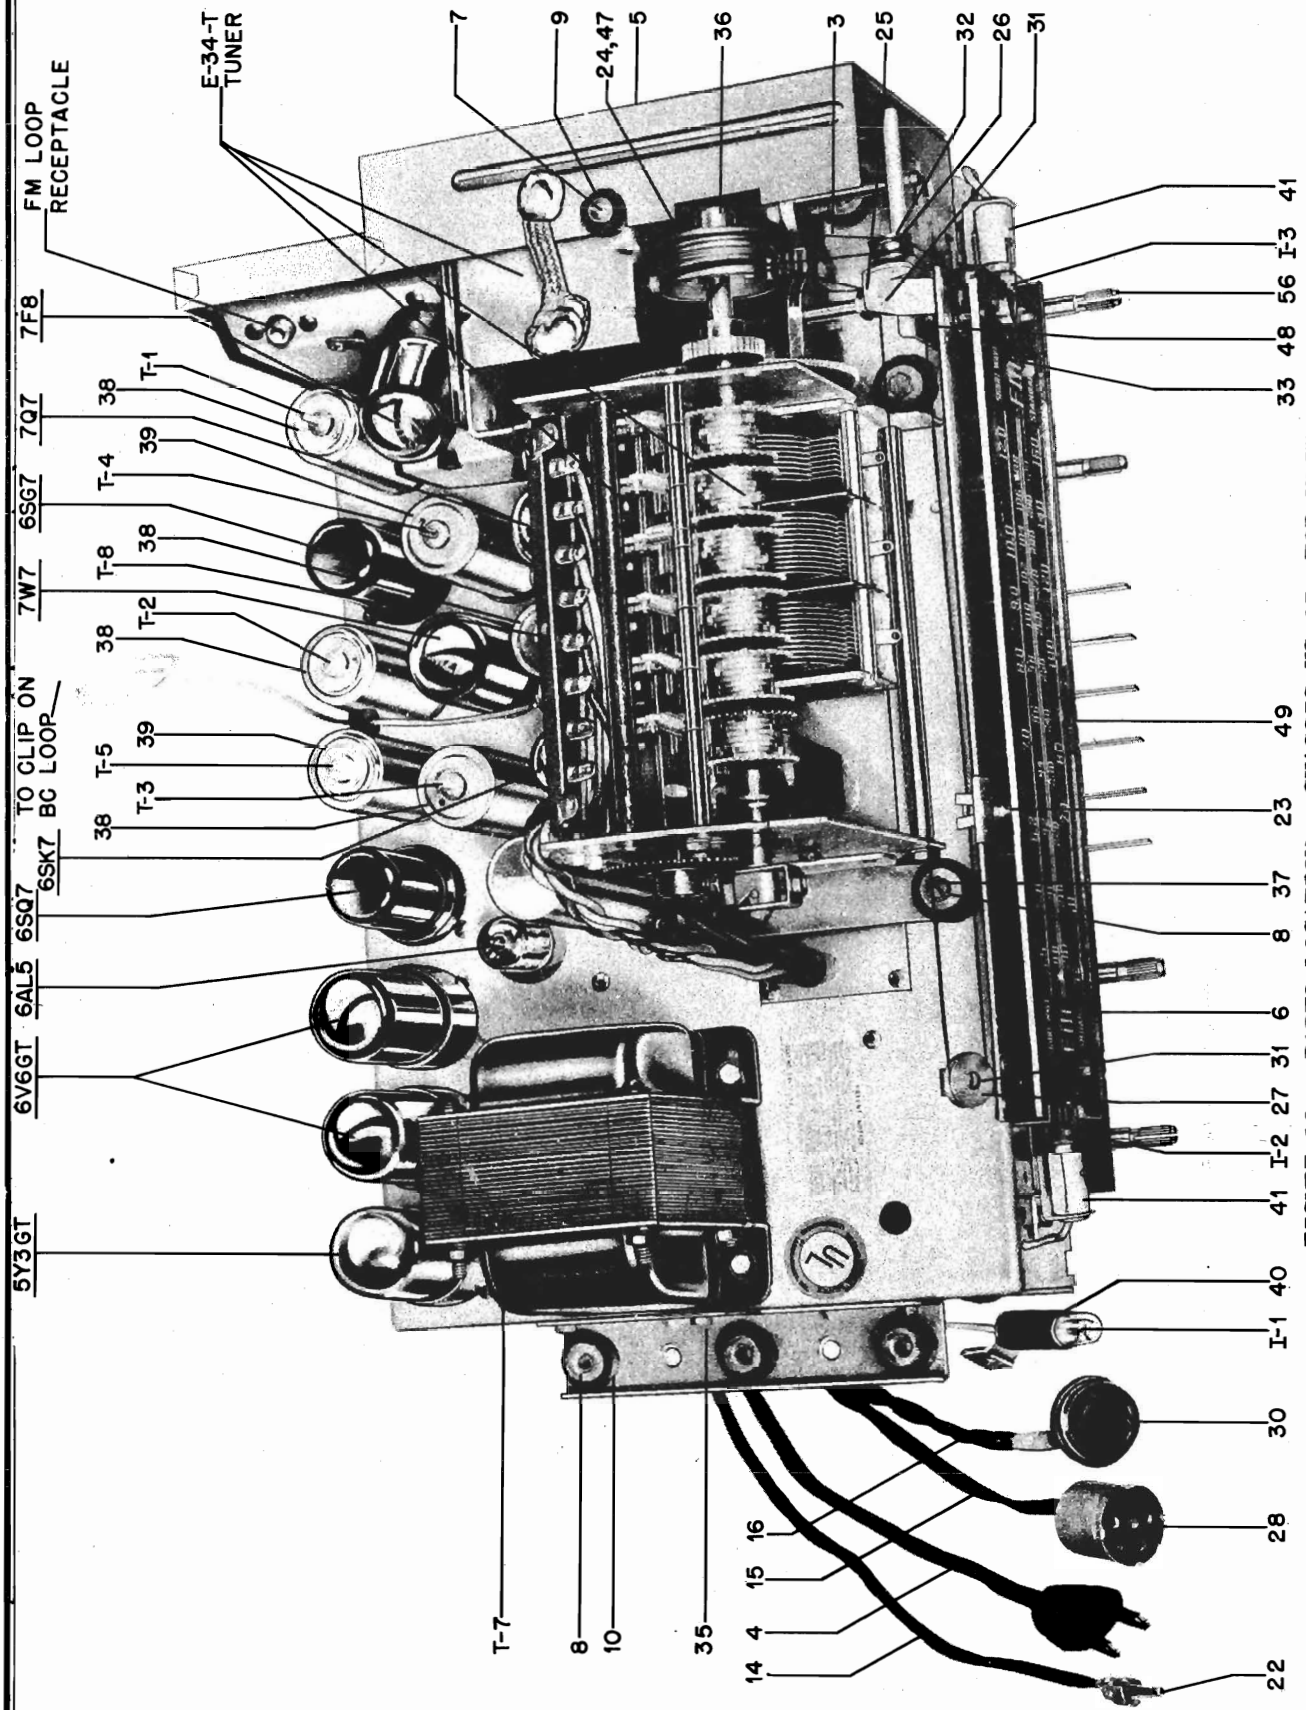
PARTS LOCATION - CHASSIS HS-87, TOP VIEW
